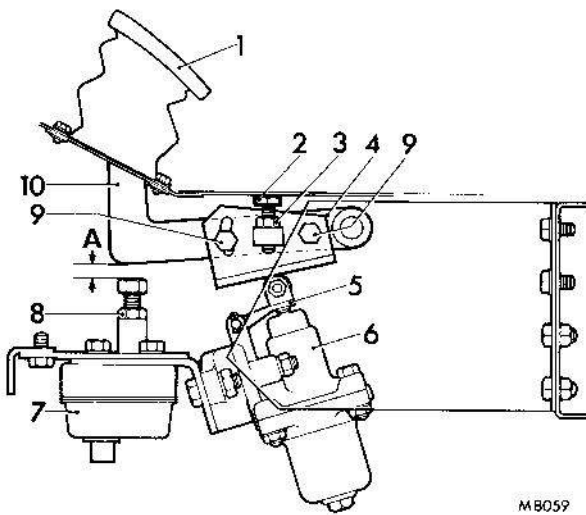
THROTTLE PEDAL SETTING DIAGRAM
